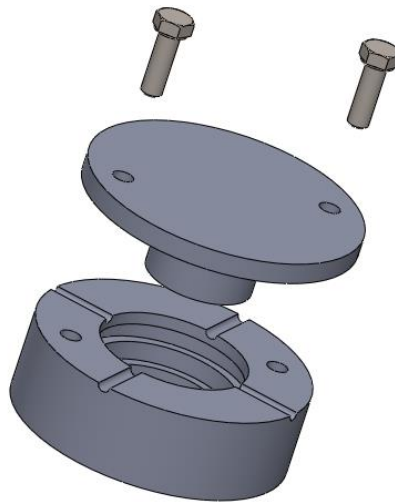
Mould assembly for the silicone ring (A.O.P.)
